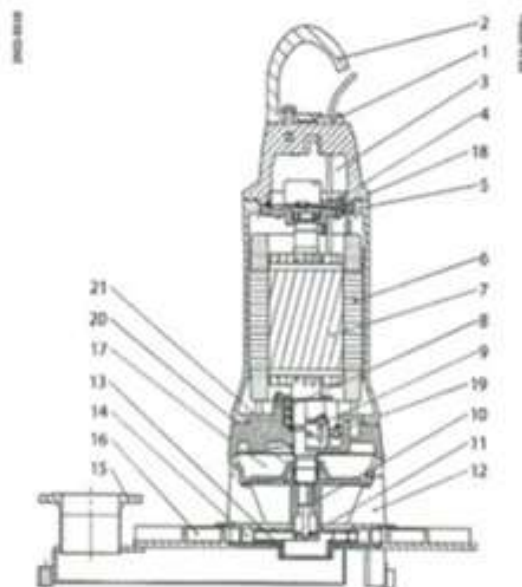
XTA/XTAK PE3-PE5 sectional drawing
